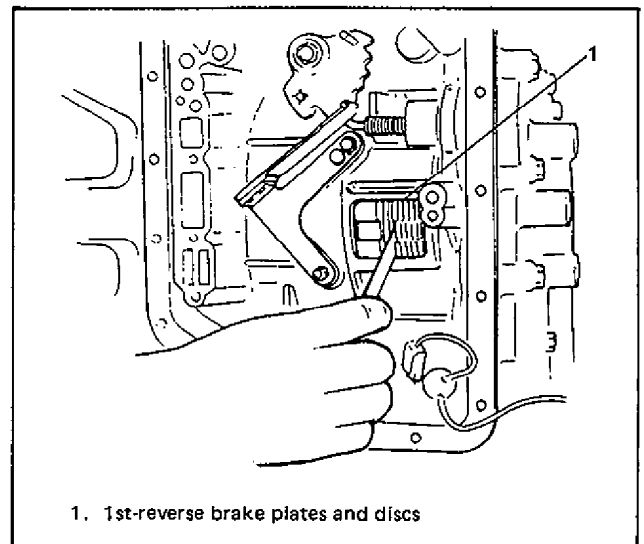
B-114 Measuring 1st-reverse Brake Clearance
